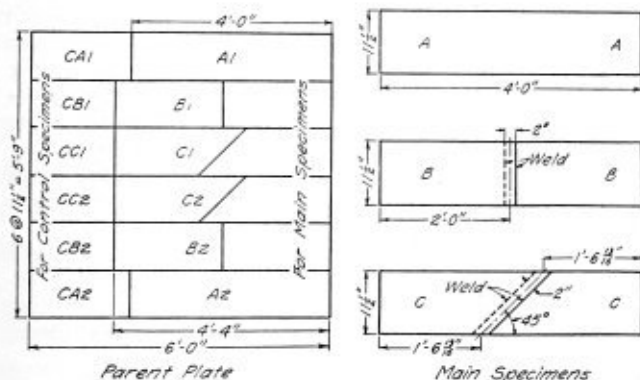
Parent plate and welded lap joints for 11½-inch specimens
